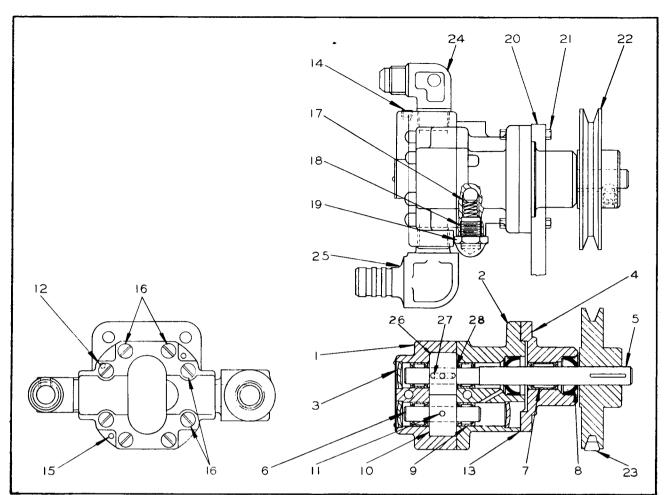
CONVERTER PUMP MOUNTING AND DRIVE GROUP (FOR POWER STEERING)
